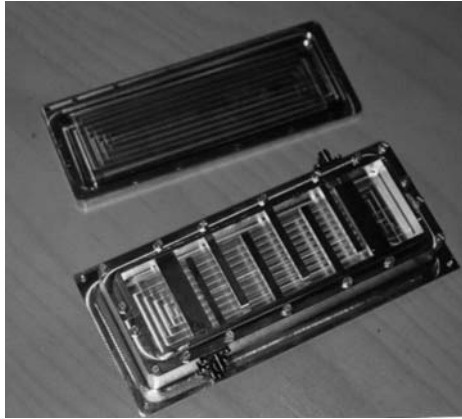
The tested filter is a fully machined construction. The track of the milling tool is visible on the bottom, but the surface roughness is better than $0.8 \mu\text{m}$. The sharpness of the resonator root has the key role. Due to milling technology it is impossible to get absolutely sharp edges of the body itself [4, 5].
